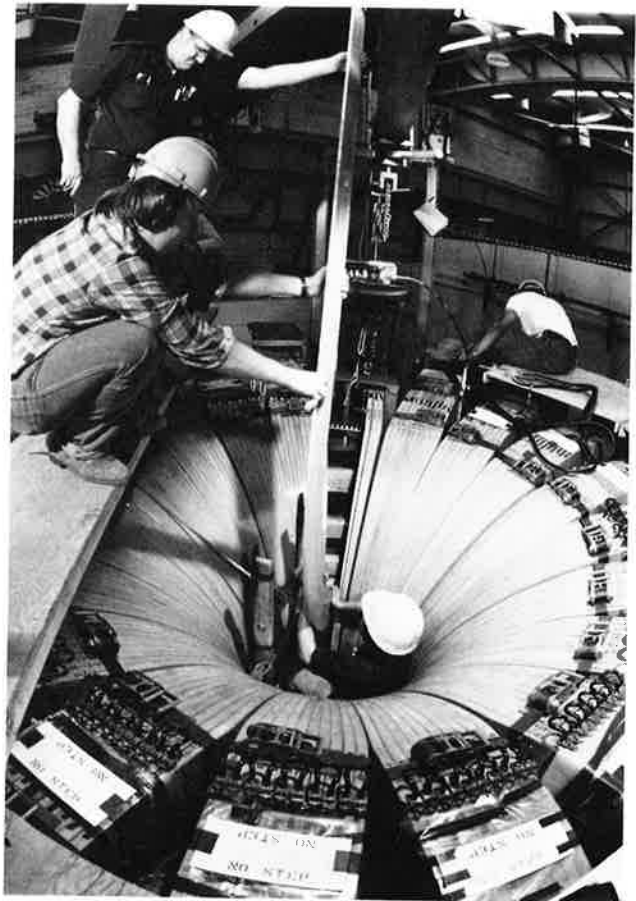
Inner segment assembly of the last PDX TF coil being lowered into place.
